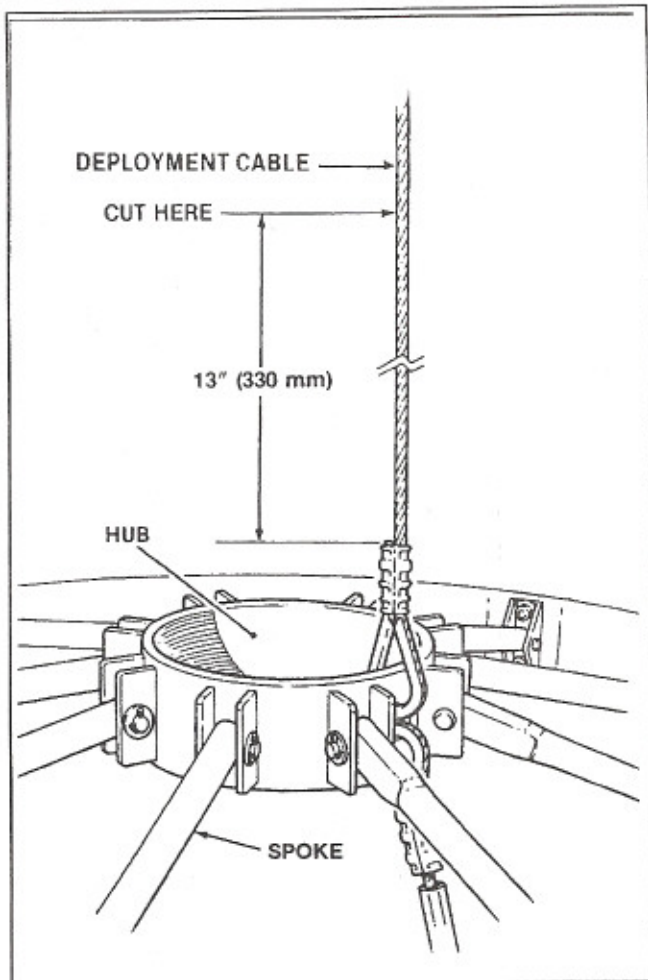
Cut 13" (330 mm) off the IDS Deployment Cable.
